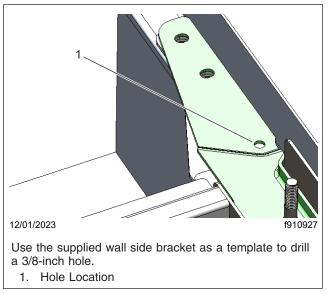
, Drilling the Hole in the Existing Wall Bracket
